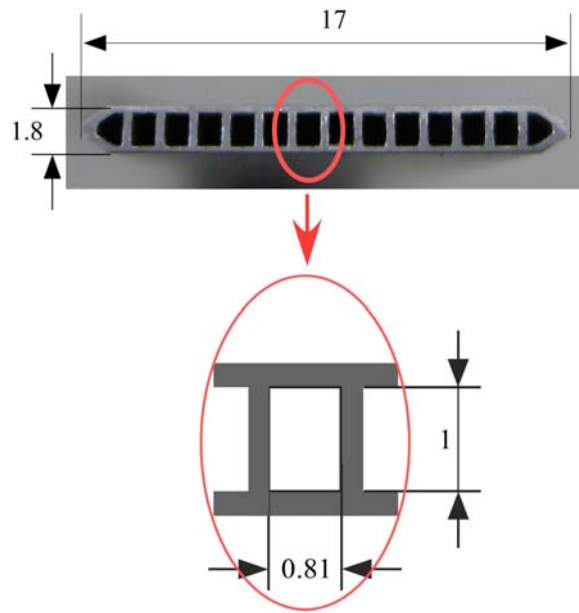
Detail dimensions of multi-port aluminum tube
